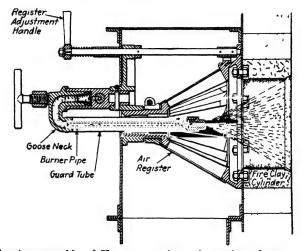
Showing assembly of Koerting mechanical atomizing burner, with forceddraft air-control register.
